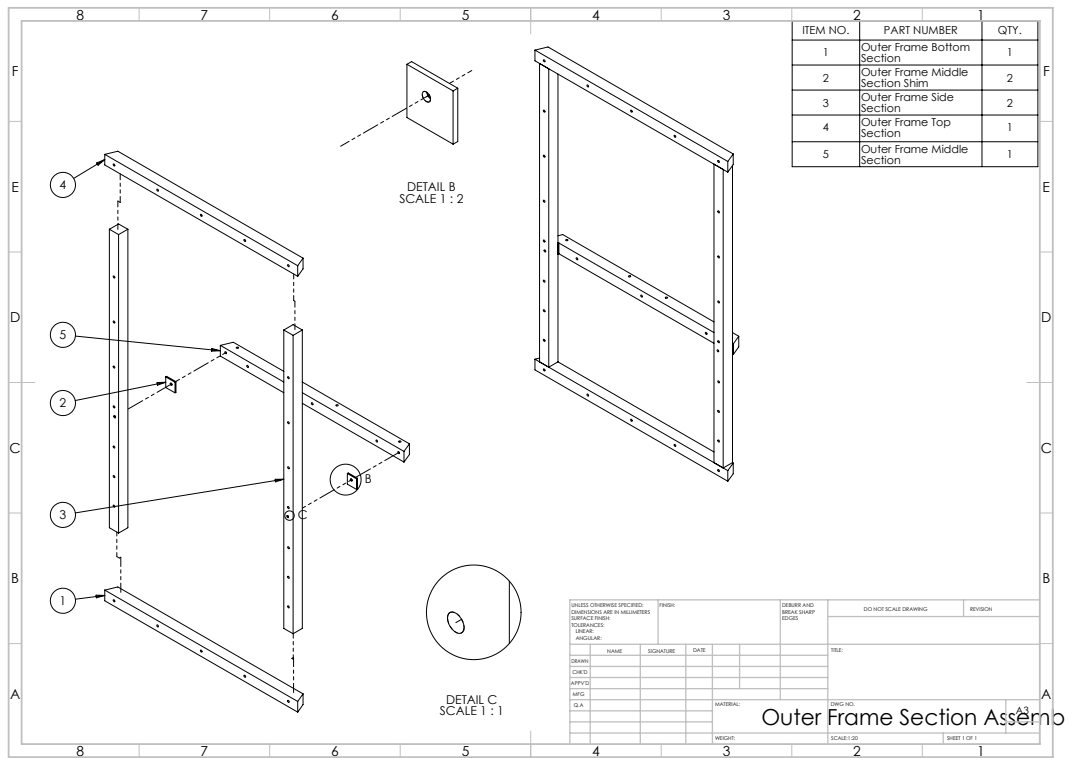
Displayed here is one of the outer frame sections from the enclosure. There were 3 separate variants of the outer frame sections; one which allowed the installation of the door and viewing with, this section (which was a generic section with no significant features) and the final which allowed the attachment of the lid sections.
